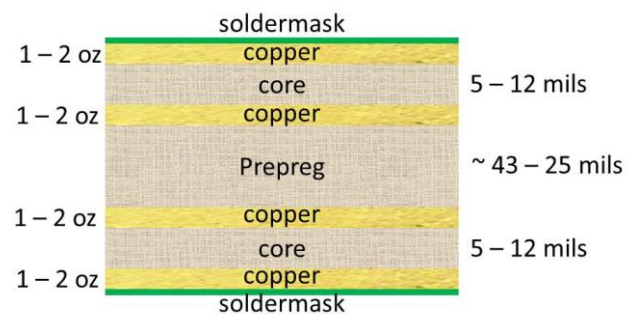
PCB stackup for a typical PCB suitable for eGaN FETs.
